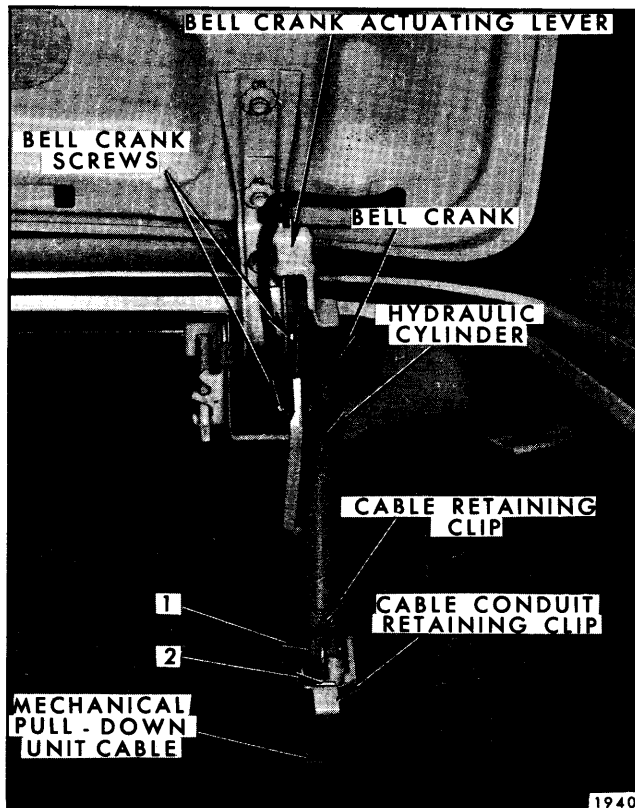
Mechanical Pull-Down Unit Hydraulic Assembly - Cadillac Styles with Option
